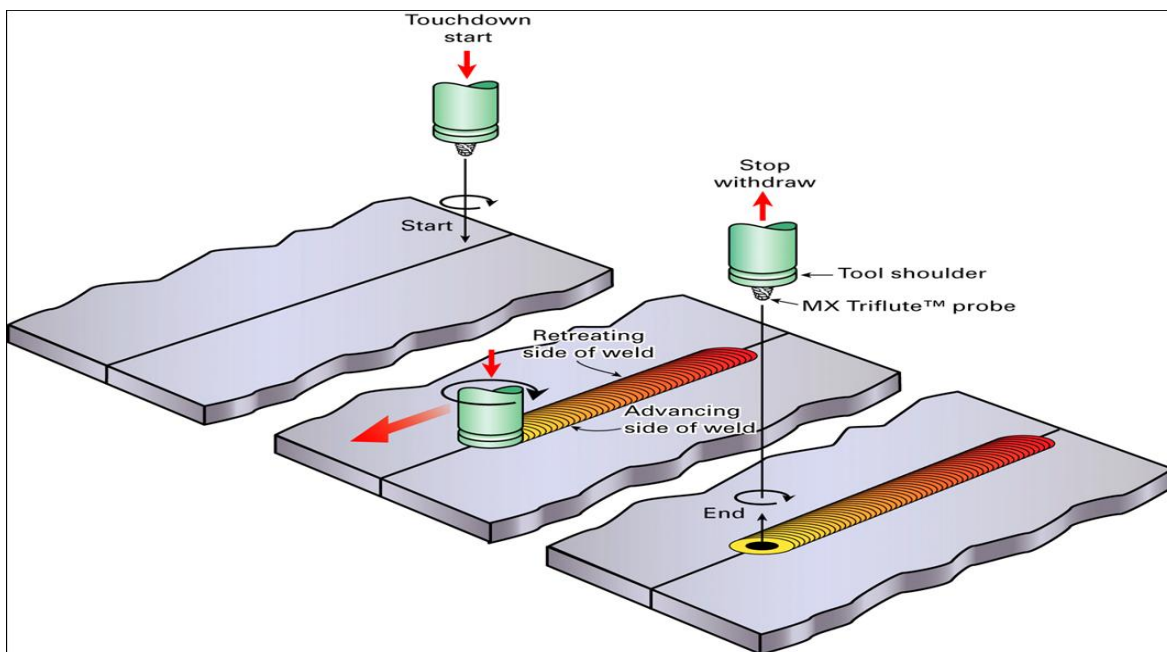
Explanation of the Friction Stir Welding Process.[4]
